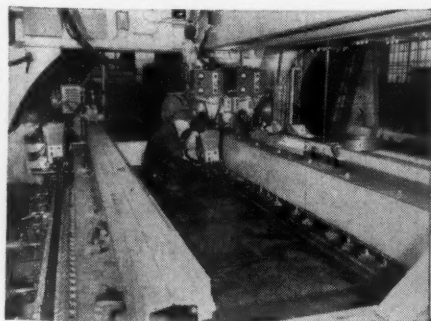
Arc welding bulb angles and pressed channel side sills to top and bottom of welded side sheets using the "Automatic Lincolnweld" process.
